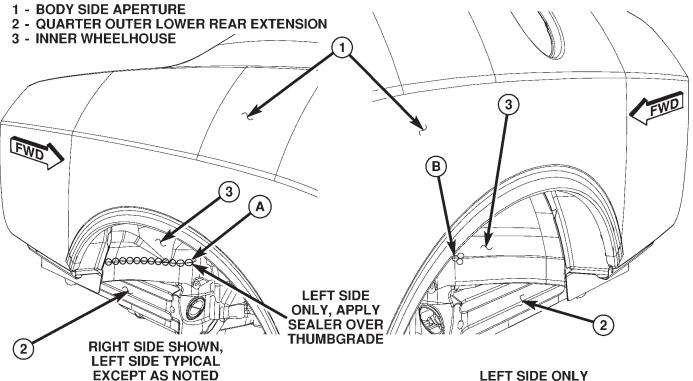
LOWER EXTENSION/LOWER WHEELHOUSE OUTER
